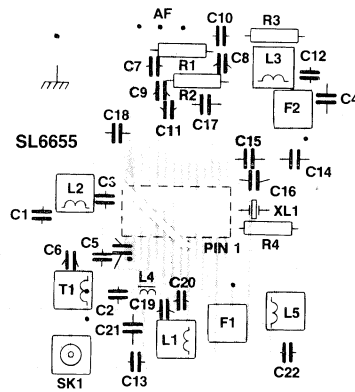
Component overlay (SL6655 surface mounted on track side of board (1:1))
